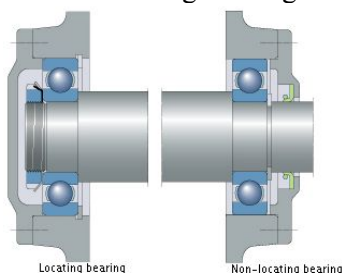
Example of locating and non-locating bearing (SKF[9]).
